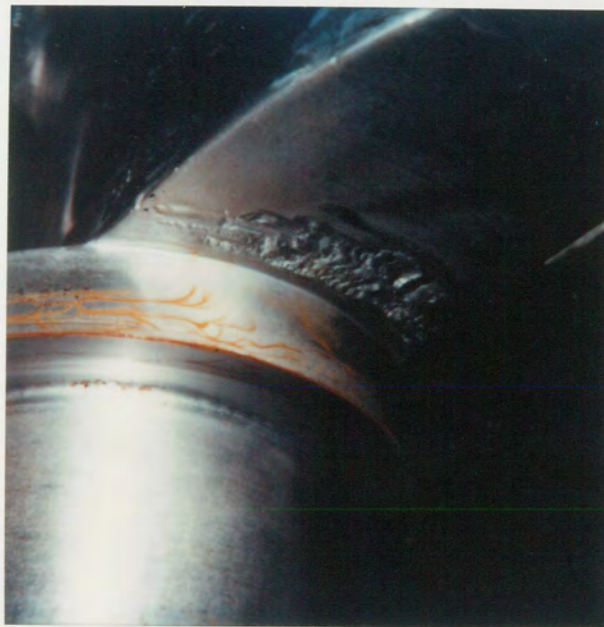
Galling Damage on Bottom of Wicket Gate #12 of Flatiron Unit 1
